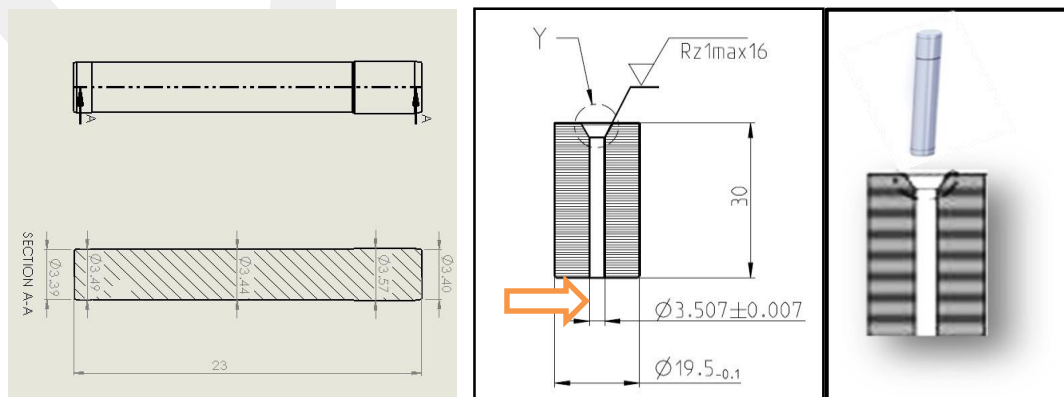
Dimensions of the pin and tube (Simple Geometry)
